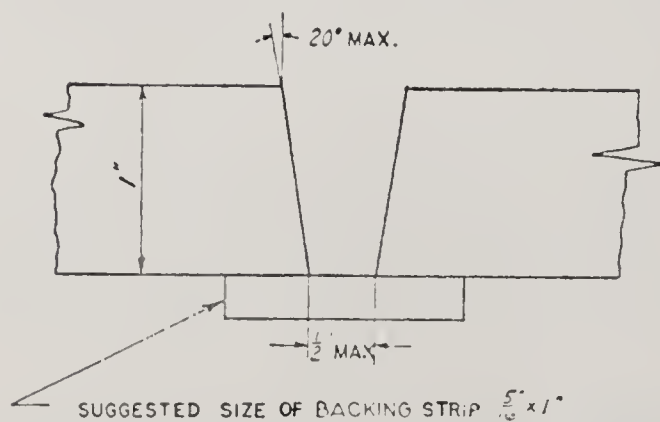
(a)—Butt Joint for Plate 1 in. Thick.
